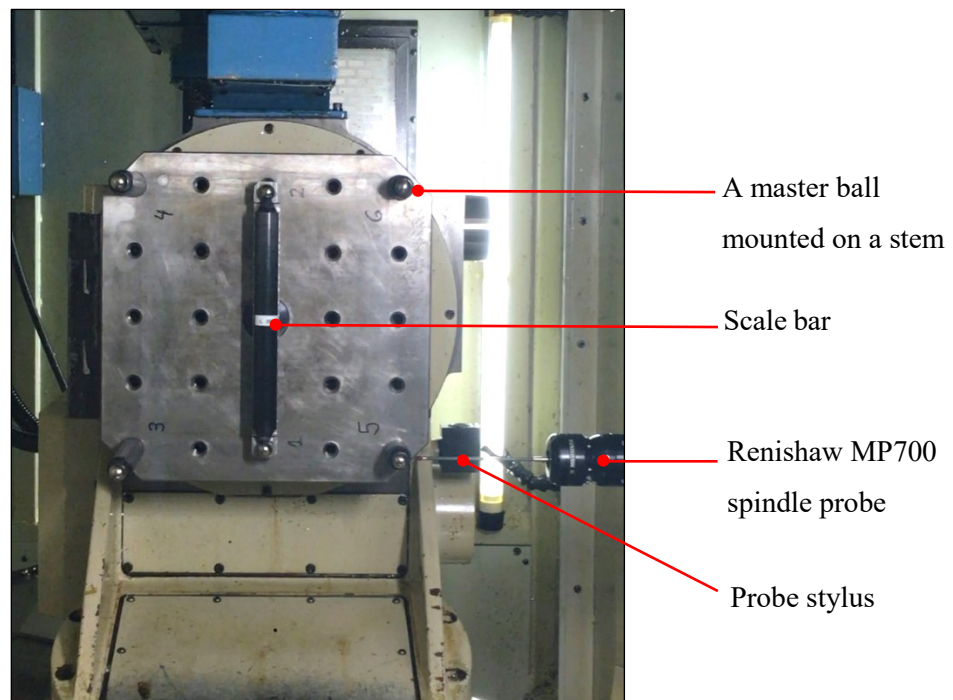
Scale and master balls being measured by a MP700 Renishaw probe on a Mitsui Seiki HU40-T machine tool of a wCBXbZY(C1)t topology
